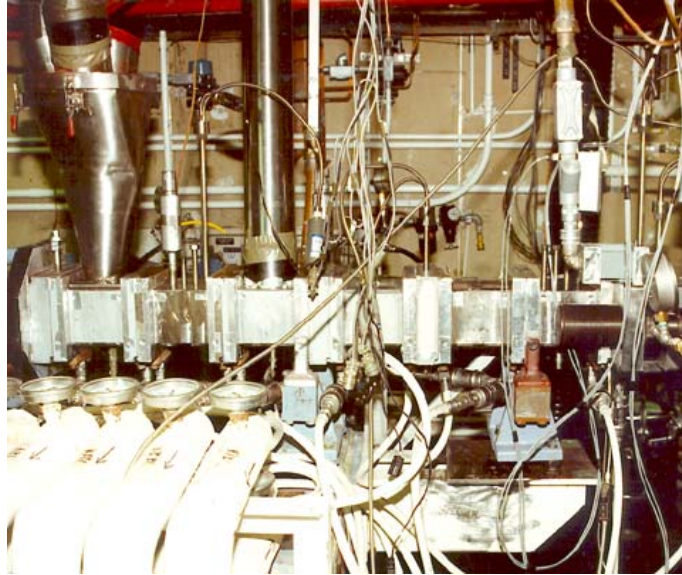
W&P 40-mm Extruder Segmented Screws
